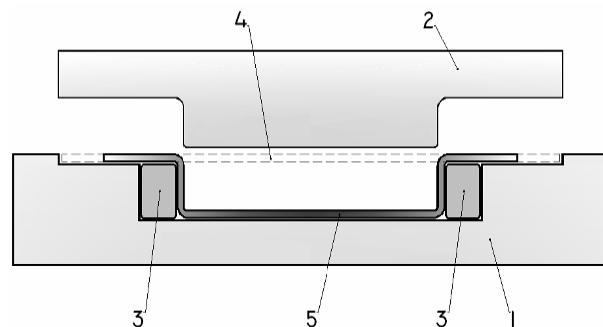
Die with modulated elements 1) inferior die; 2) superior die; 3) modulated elements; 4) steel sheet; 5) engine mount blank
